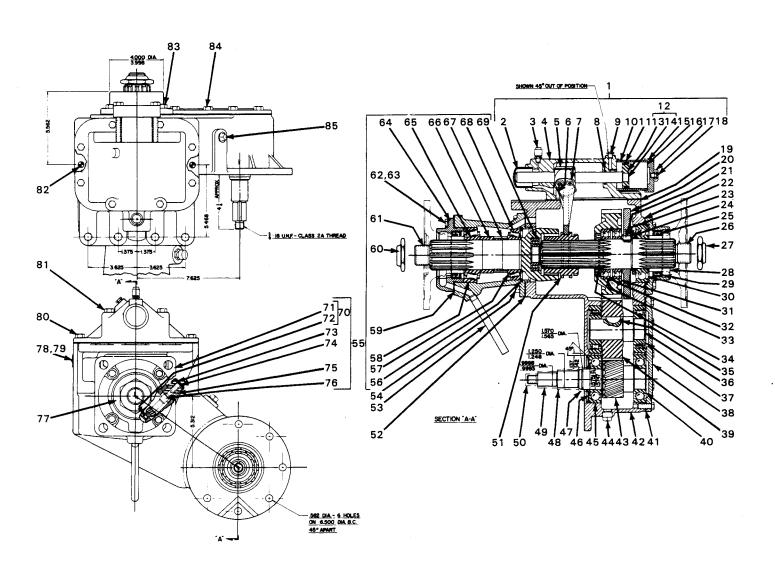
P/N 14017 Gear Box Assembly For Pump Model 06C3-GH1
